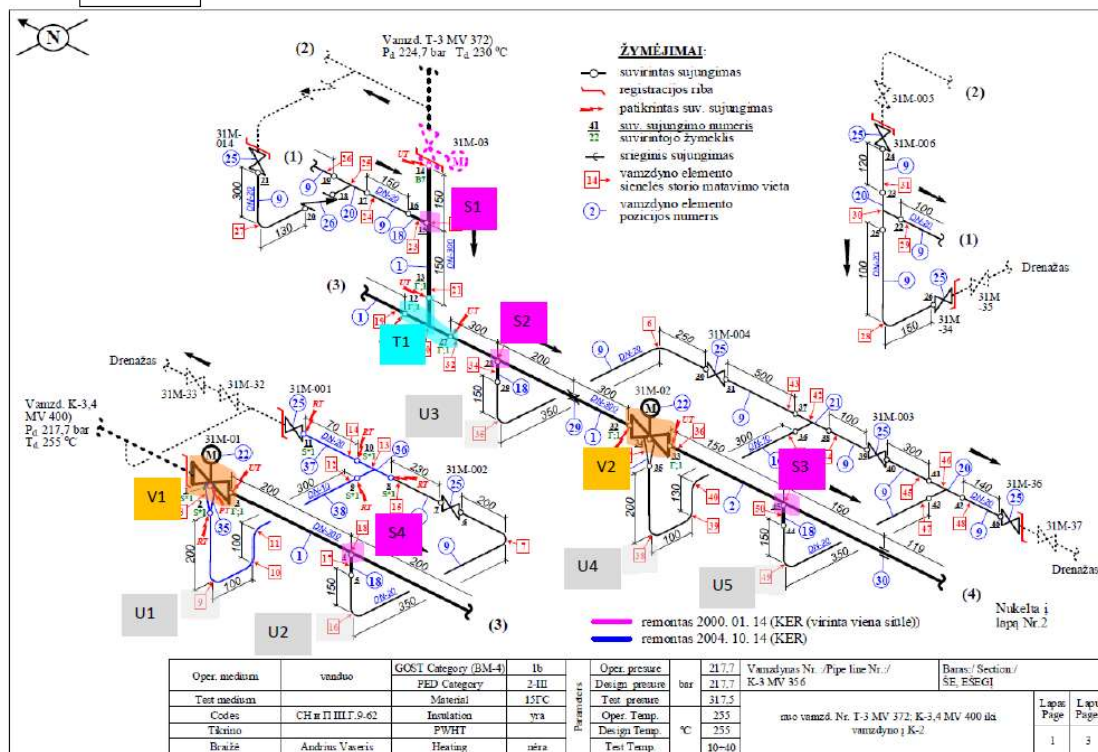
Scheme of the areas for testing the elbow, arc and welded joint (circumferential weld).
